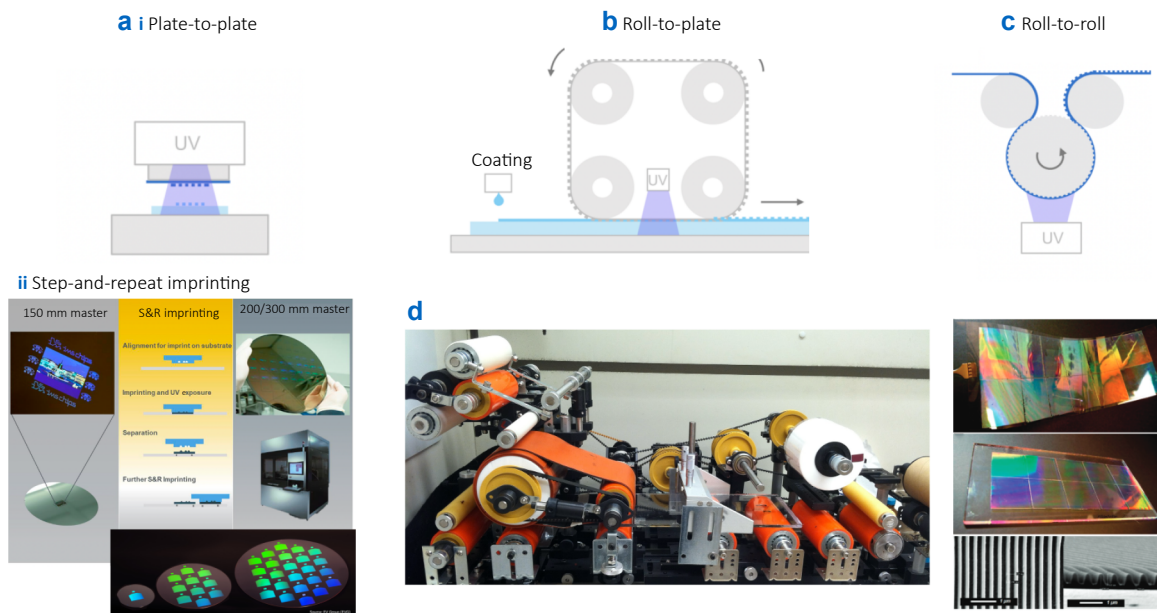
| (a-i) Schematic diagram of plate-to-plate imprinting. (a-ii) Step-and-repeat imprinting. (b) Roll-to-plate imprinting. (c) Roll-to-roll imprinting. (d) Pictures of the roll-to-plate imprinting setup and the imprinted structures. Figure reproduced with permission from: (a-i, b, c) ref.⁸⁸, SPIE; (a-ii) ref.⁹², SPIE; (d) ref.^{88, 93}, American Chemical Society.
